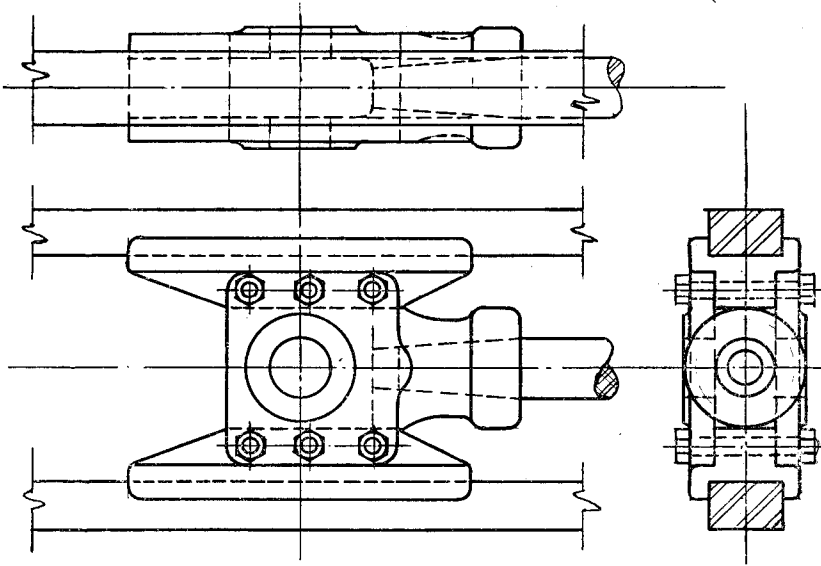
Crosshead for  $3\frac{1}{2}$ -in. gauge locomotive. Machined from bar steel
